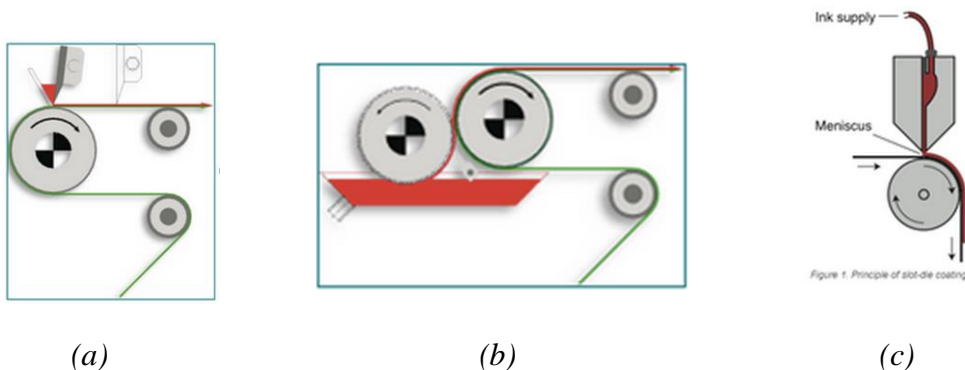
Illustrates the Slurry Coating Process: (a) Knife Coating, (b) Engraved roller, (c) Slot die
